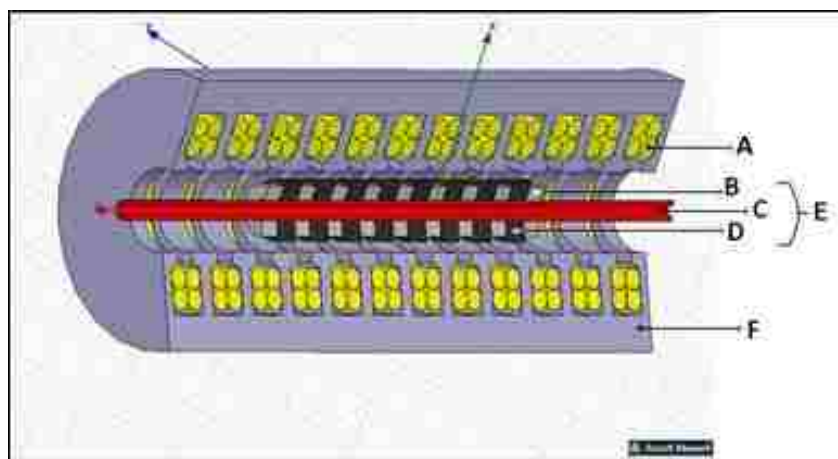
Proposed TL-IPM. The parts (labelled) consists of: A. Coil Windings; B. Ferromagnetic Material (e.g. Iron); C. Support Tube; D. Permanent Magnet; E. Translator; F. Stator
